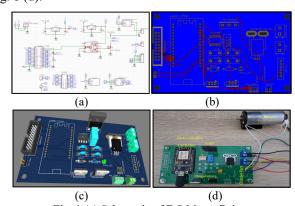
(a) Schematic of DC Motor Drive, (b) PCB layout of DC Motor Drive , (c) PCB (3D) of DC Motor Drive, (d) PCBA of DC Motor Drive
